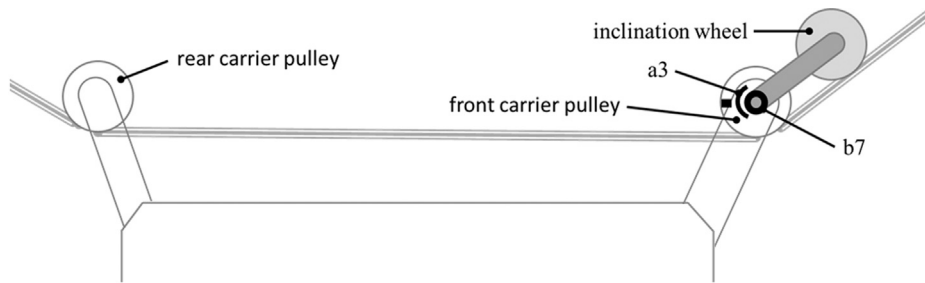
Sensors on a carriage with single front and rear carrier pulleys and an inclination wheel measuring device.
